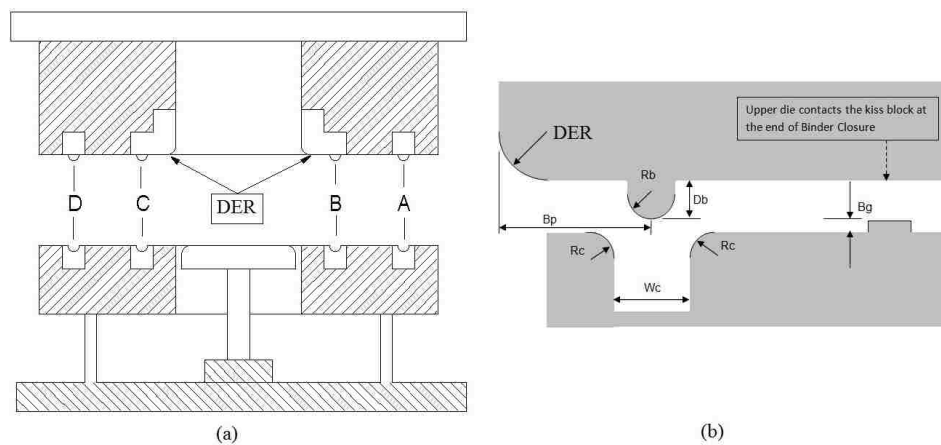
(a) schematic view of the die with changeable inserts with various die entry radius and inboard drawbeads (B, C) and outboard beads (A, D); (b) dimensional parameters of die drawbead block and kiss block on the binder shown in open position
